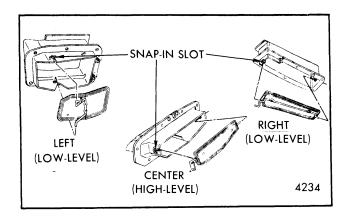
High-Level and Low-Level Air Outlets and Doors - "B-C-E" Styles ("A" Styles Similar)
